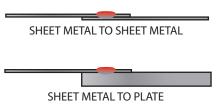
Plug welds can be used to join sheet metal to sheet metal or sheet metal to plate.
